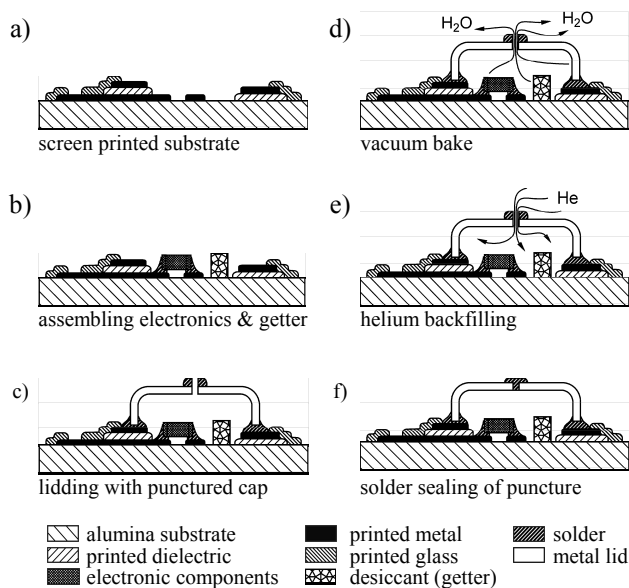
Fabrication, drying and sealing of miniature hermetic package.
